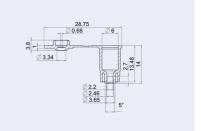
Detail drawing of tank Fluidic 833 with cap for venting purposes
